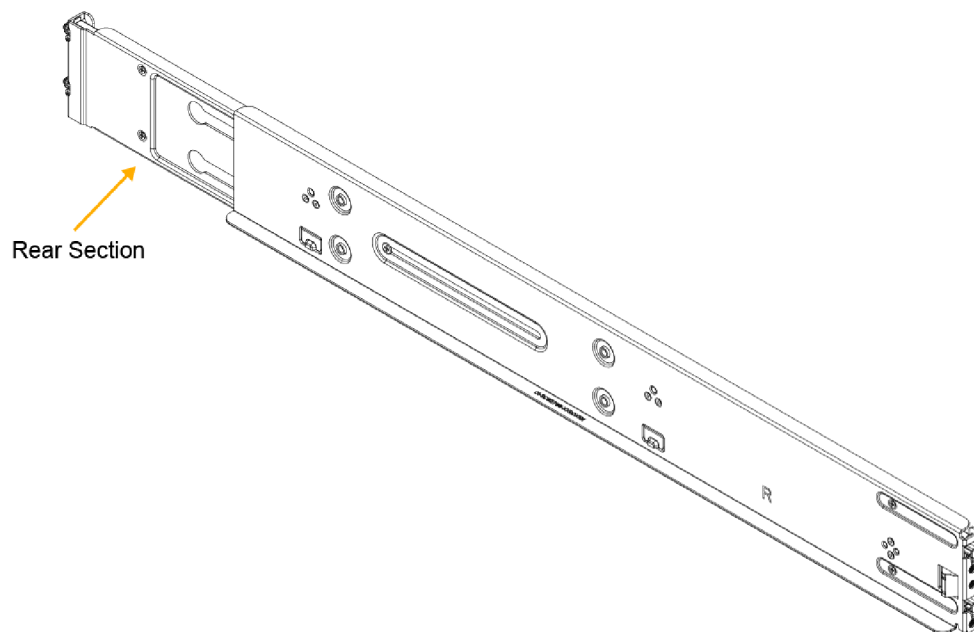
Rackmount Rail (Right Rail Assembly Shown)
